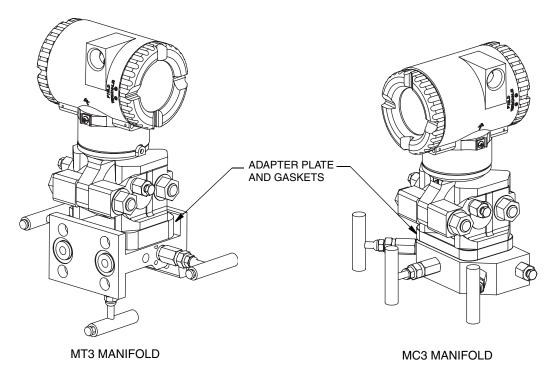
Typical Mounting of IDP Transmitter on Coplanar Manifold
